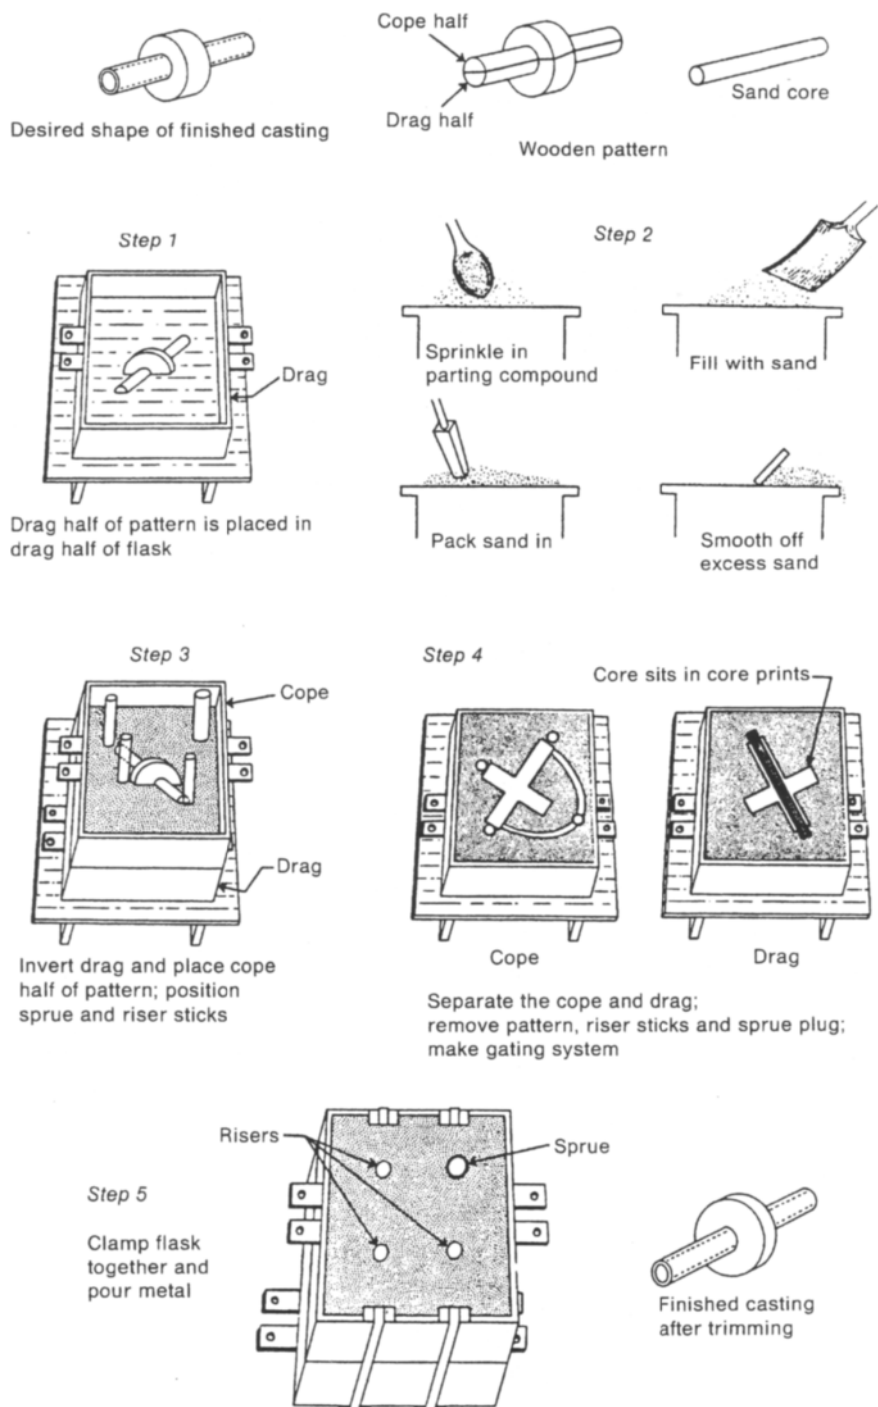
Steps involved in processing a sand casting. (Reprinted with the permission of ASM International, Materials Engineering Institute.)
